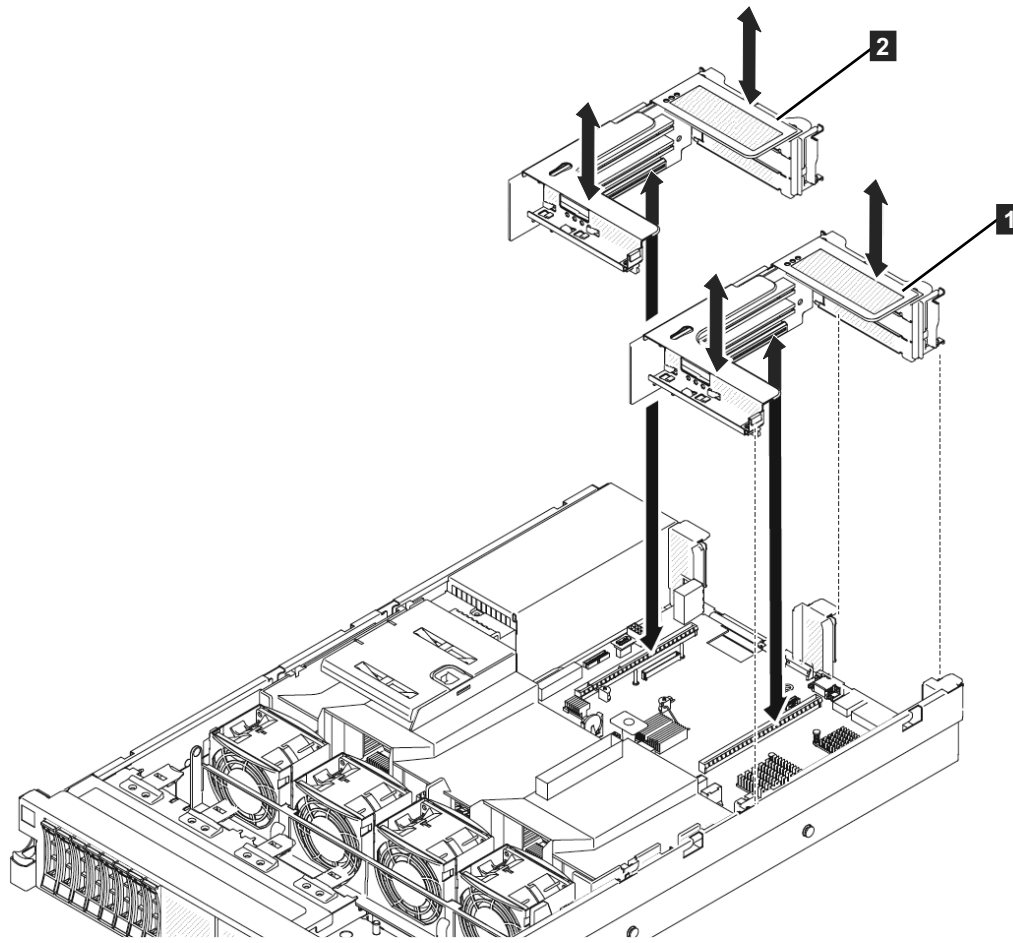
Replacing the 2145-DH8 PCI express riser card assembly
